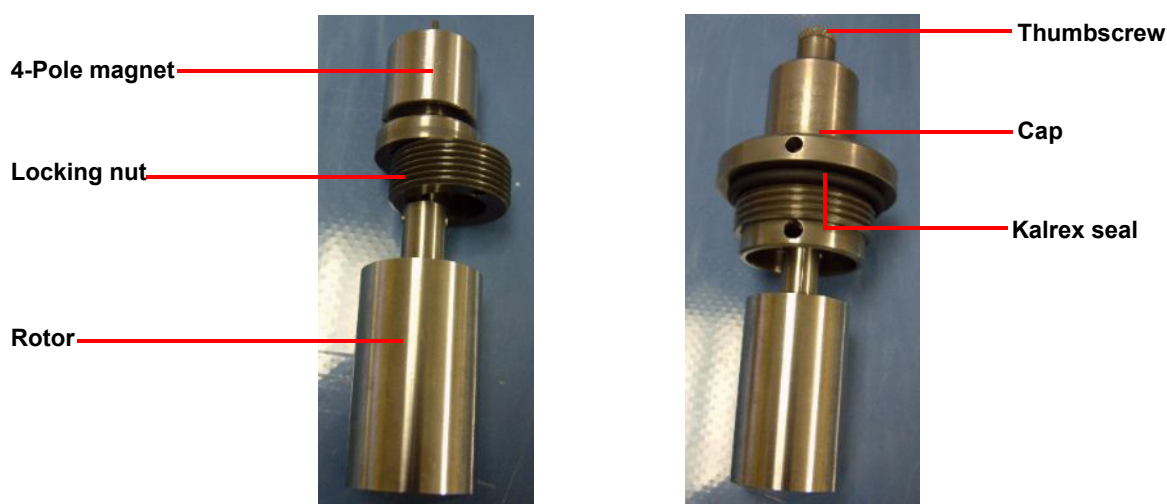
Pressure cell rotor assembly with cap off (left) and on (right).
